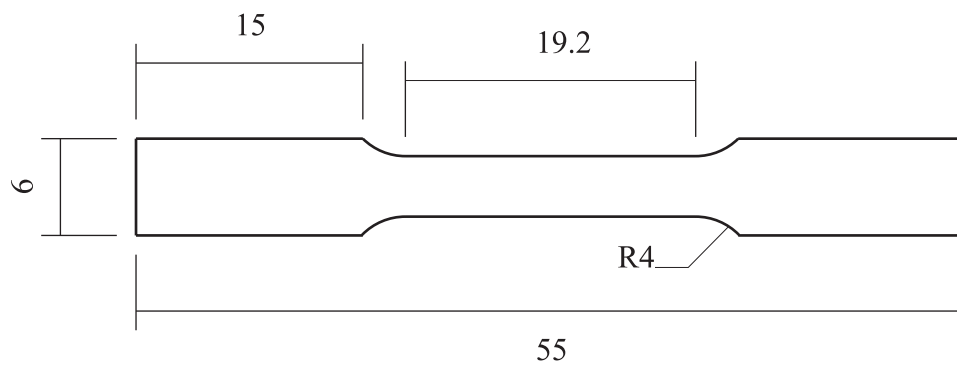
Braze filler dogbone specimen dimensions (units: mm).
